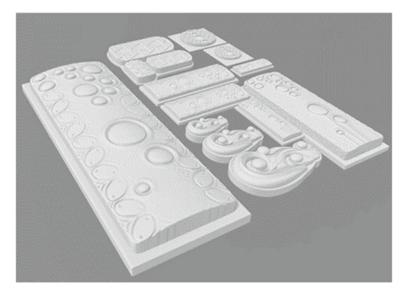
3D CAD master pattern of jewelry ceramic molds
